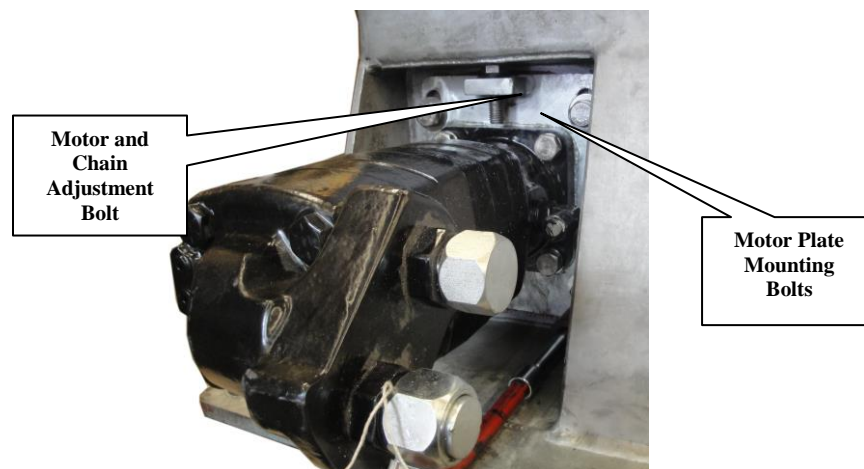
Hydraulic Motor and Motor Plate Adjustment Bolt
